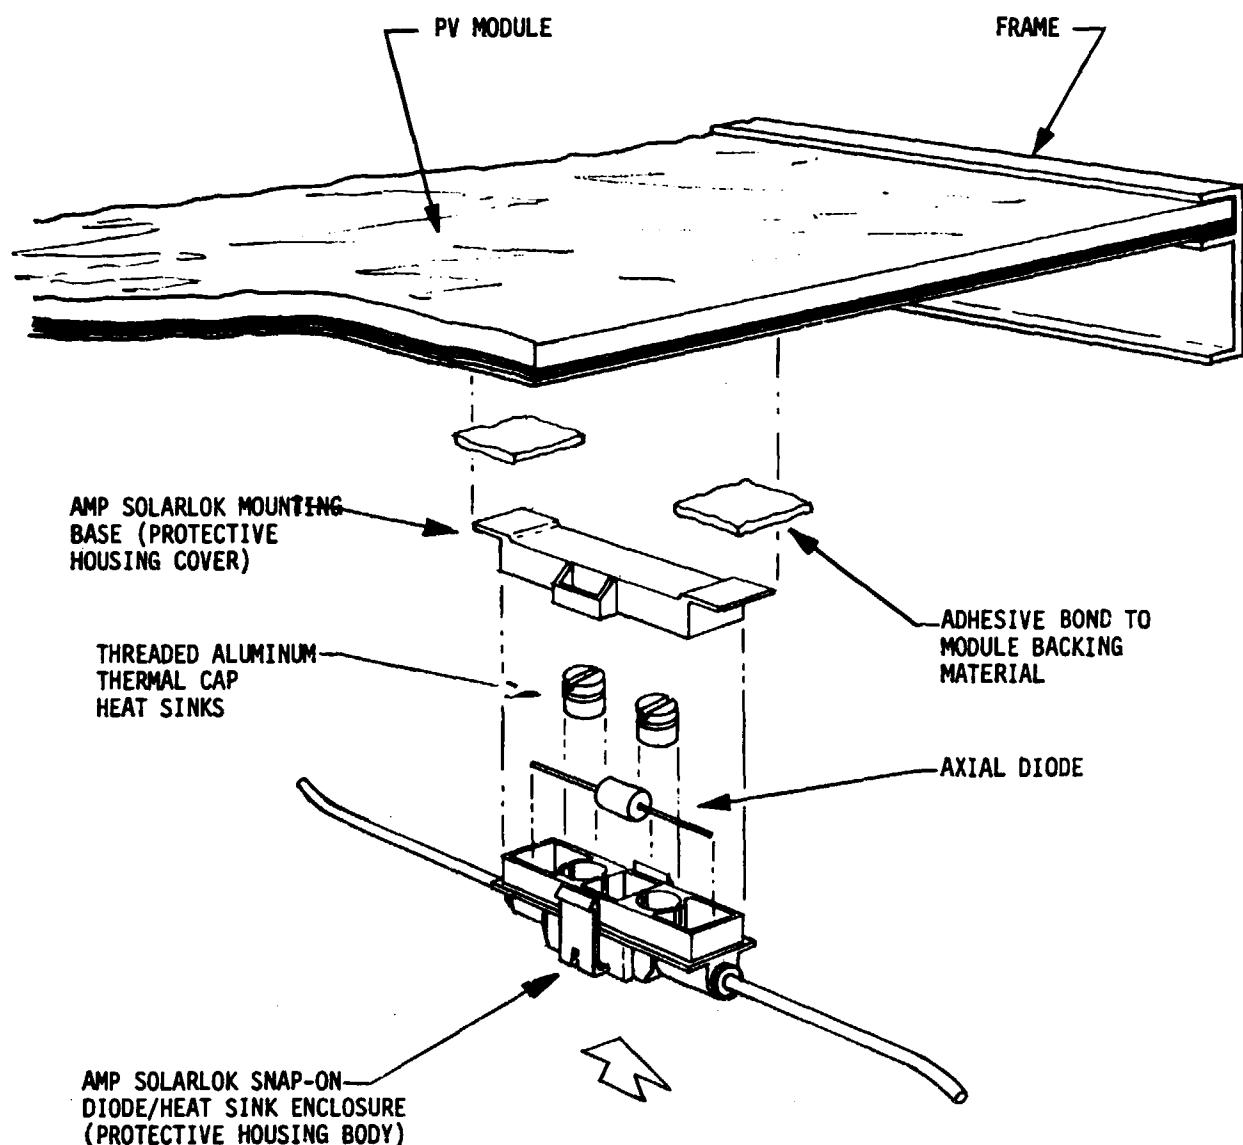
Axial Diode Package Mounted to Back of PV Module
